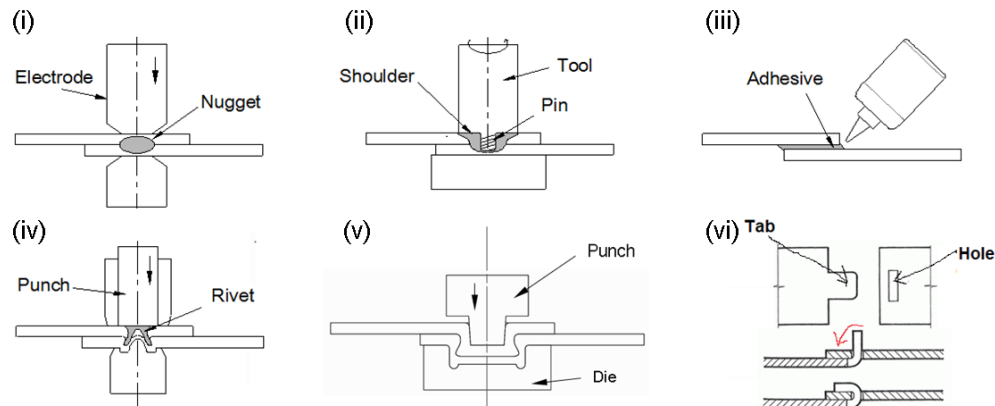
Schematic representation of the mostly used processes to date into obtaining an overlap sheet joint: (i) Resistance Spot Welding; (ii) Friction Stir Spot Welding; (iii) Adhesive Bonding; (iv) Self-pierce Riveting; (v) Clinching; (vi) Hemming
